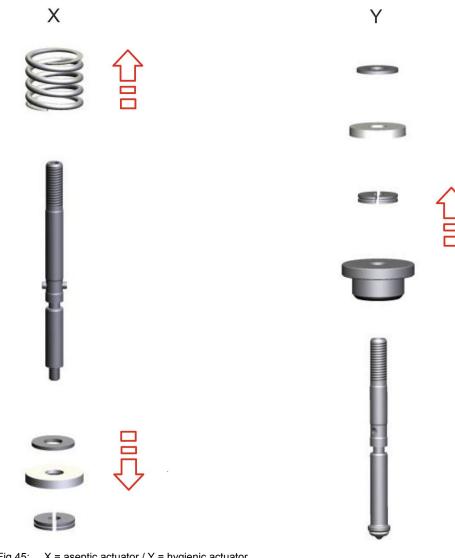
X = aseptic actuator / Y = hygienic actuator \rightarrow Actuator PA35 PV is disassembled.
